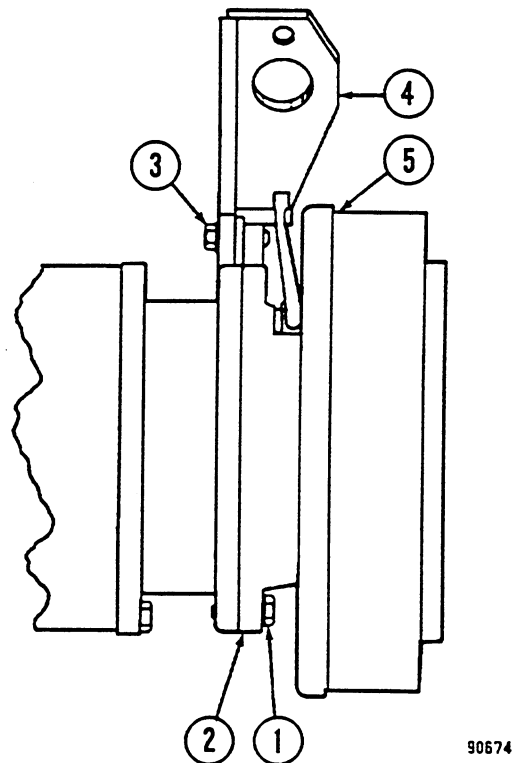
PARKING BRAKE RETAINER REMOVAL
